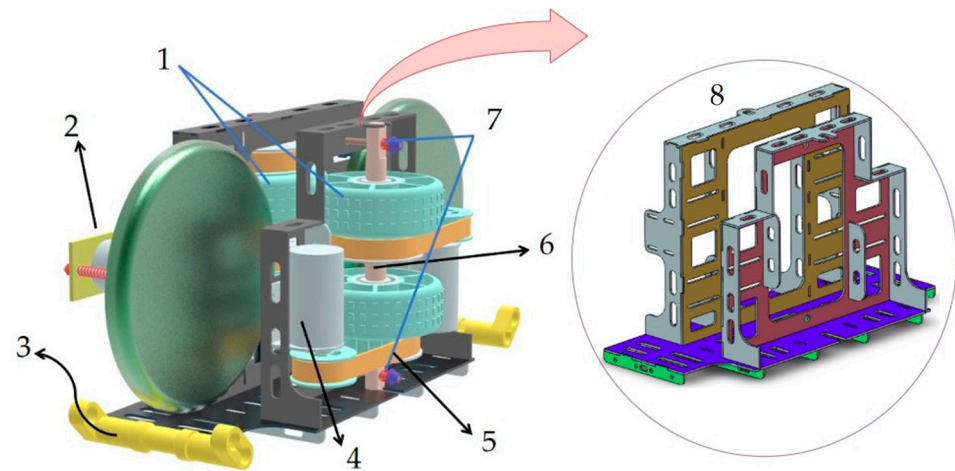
Machine model: 1—walking wheel; 2—cleaning device; 3—miniature photoelectric sensor; 4—encoder deceleration motor; 5—synchronous belt; 6—active spindle; 7—compression spring; 8— Π -shaped framework.
